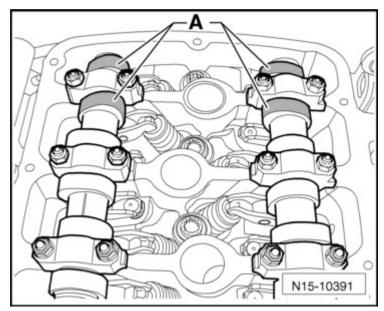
Camshaft Lobes For Cylinder Facing Each Other Courtesy of AUDI OF AMERICA, LLC
